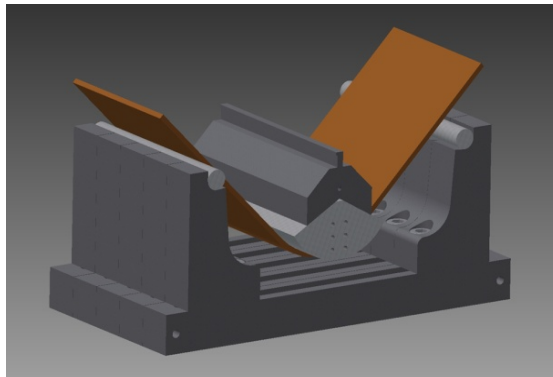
Preliminary designed tool set for the ultimate bending machine.
